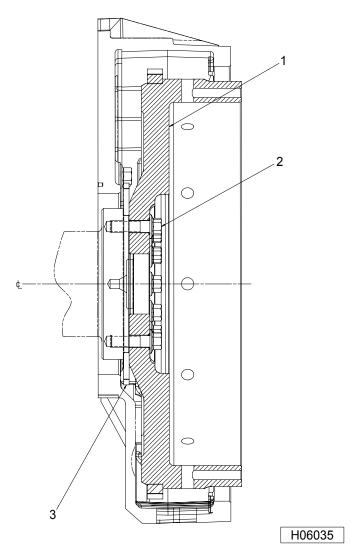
Pot type flywheel - for multiple plate clutch applications, 800 lbf·ft and above
